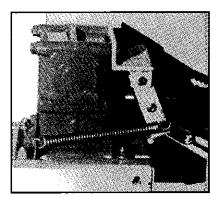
GEARBOX (WITH GUARD REMOVED)
